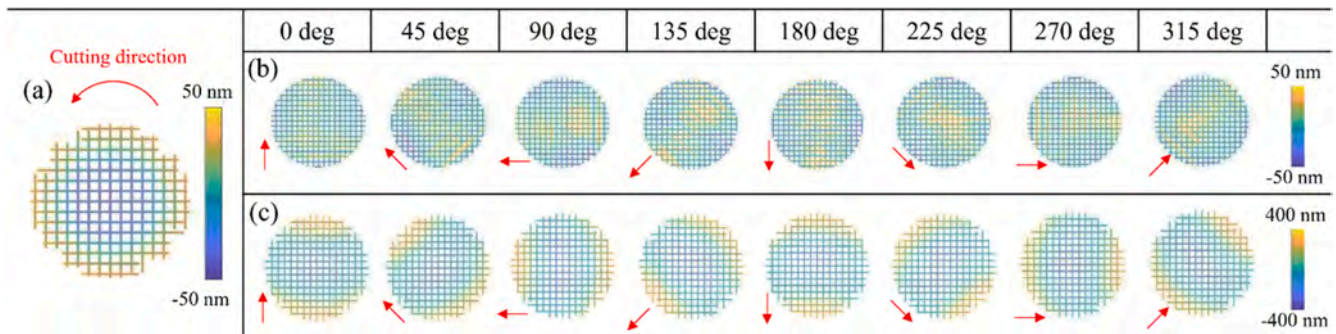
Form error map of the (a) machined center spherical dimple by STS and eight outer spherical dimples machined by (b) STS and (c) FTS.
